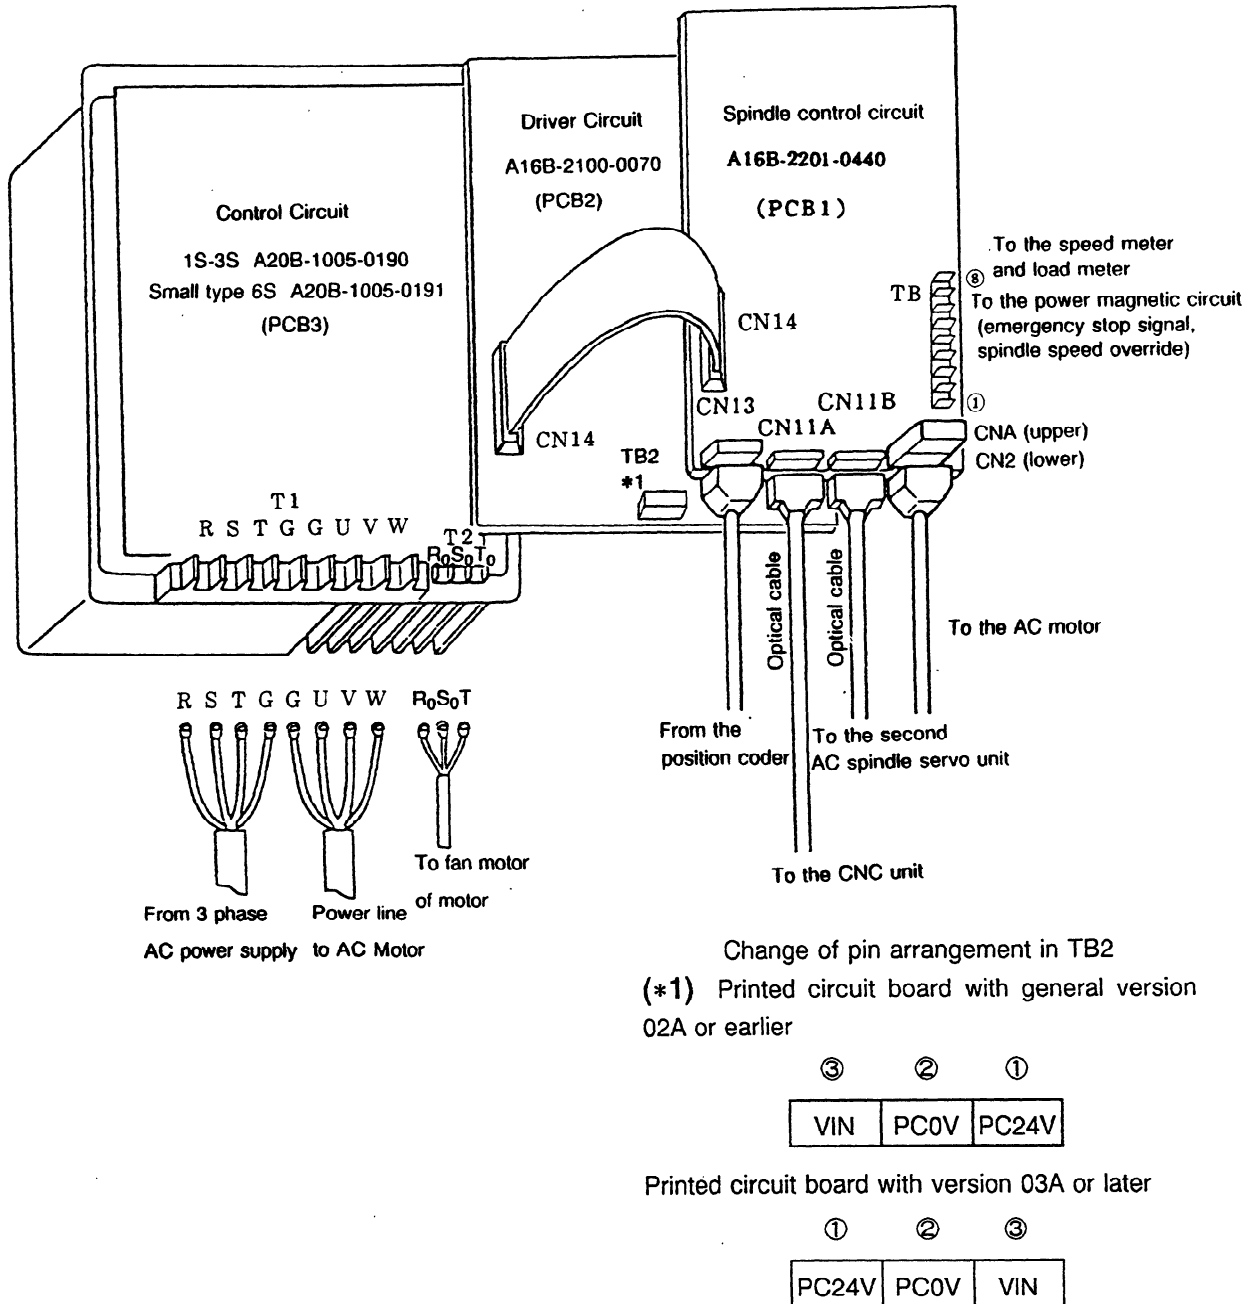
Cable routing (Models 1S - 3S)
